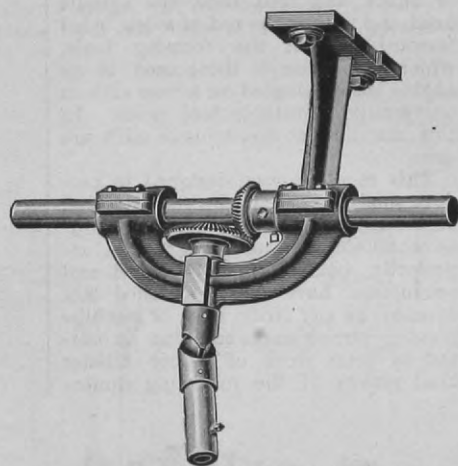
Driving Shaft Connection for Drilling Attachment.
